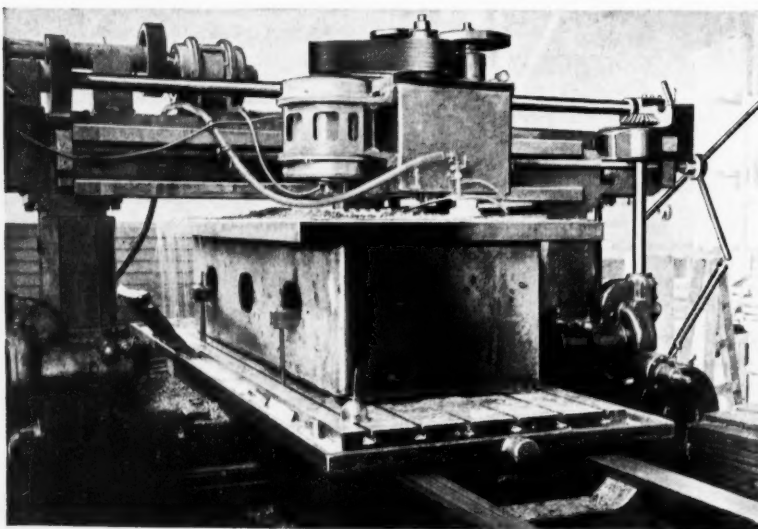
The Arc-welded Base of the "Tournomatic" being Machined
